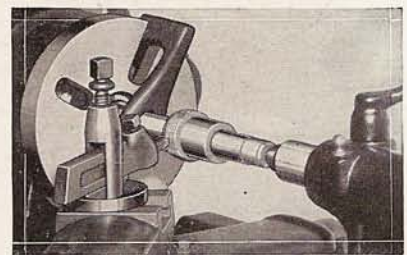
Cutting a Screw Thread on a Bushing in the 16-inch South Bend Lathe.
